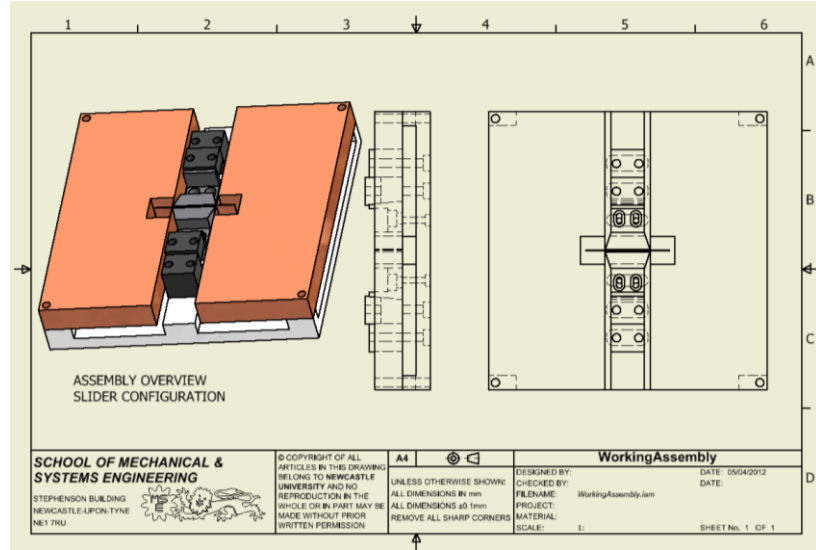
CAD drawing of the complete P3B assembly, as fabricated. Bolted fastenings are omitted for clarity.
